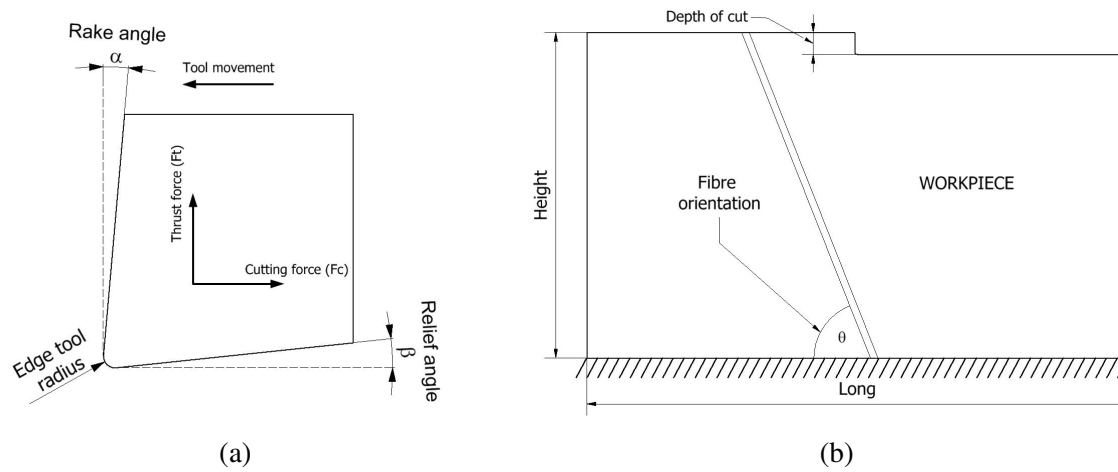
(a) Tool and (b) workpiece cutting parameters.
